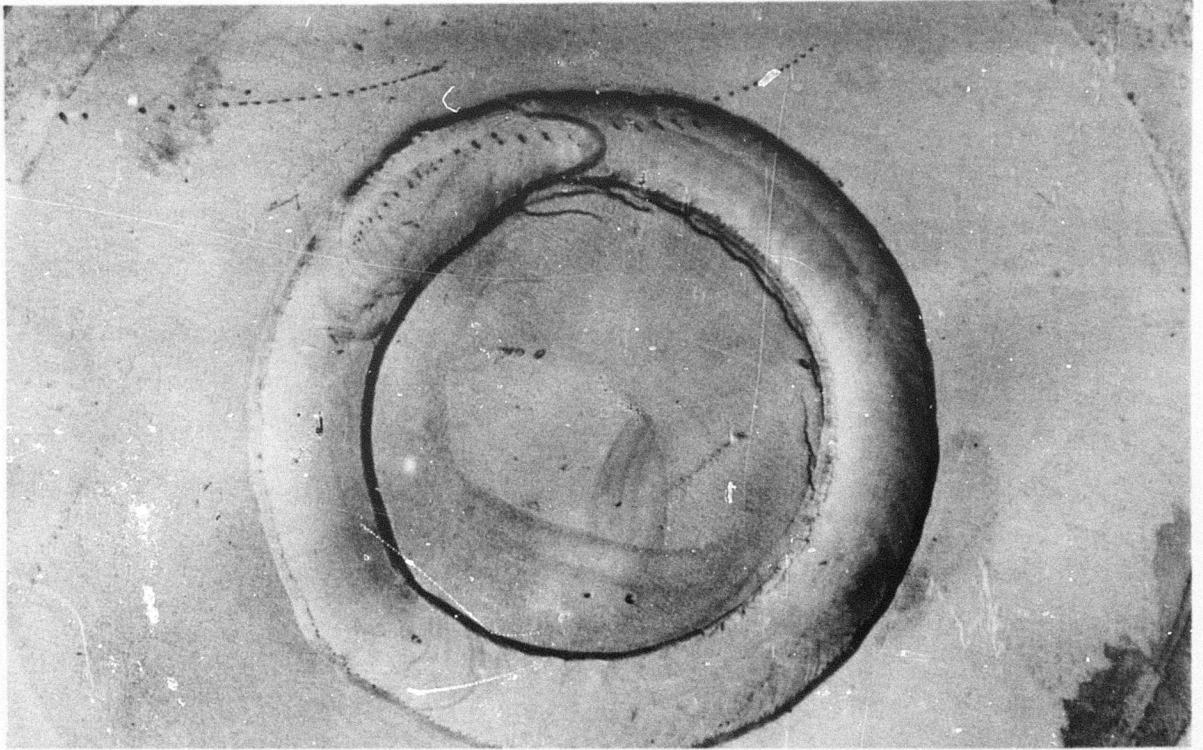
Parent Metal Cracking that Occurred During Welding of 1/4" Rene' 41
